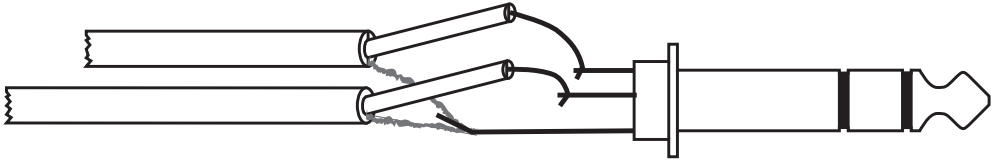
Wiring of a stereo contact mike pair to a stereo plug.
